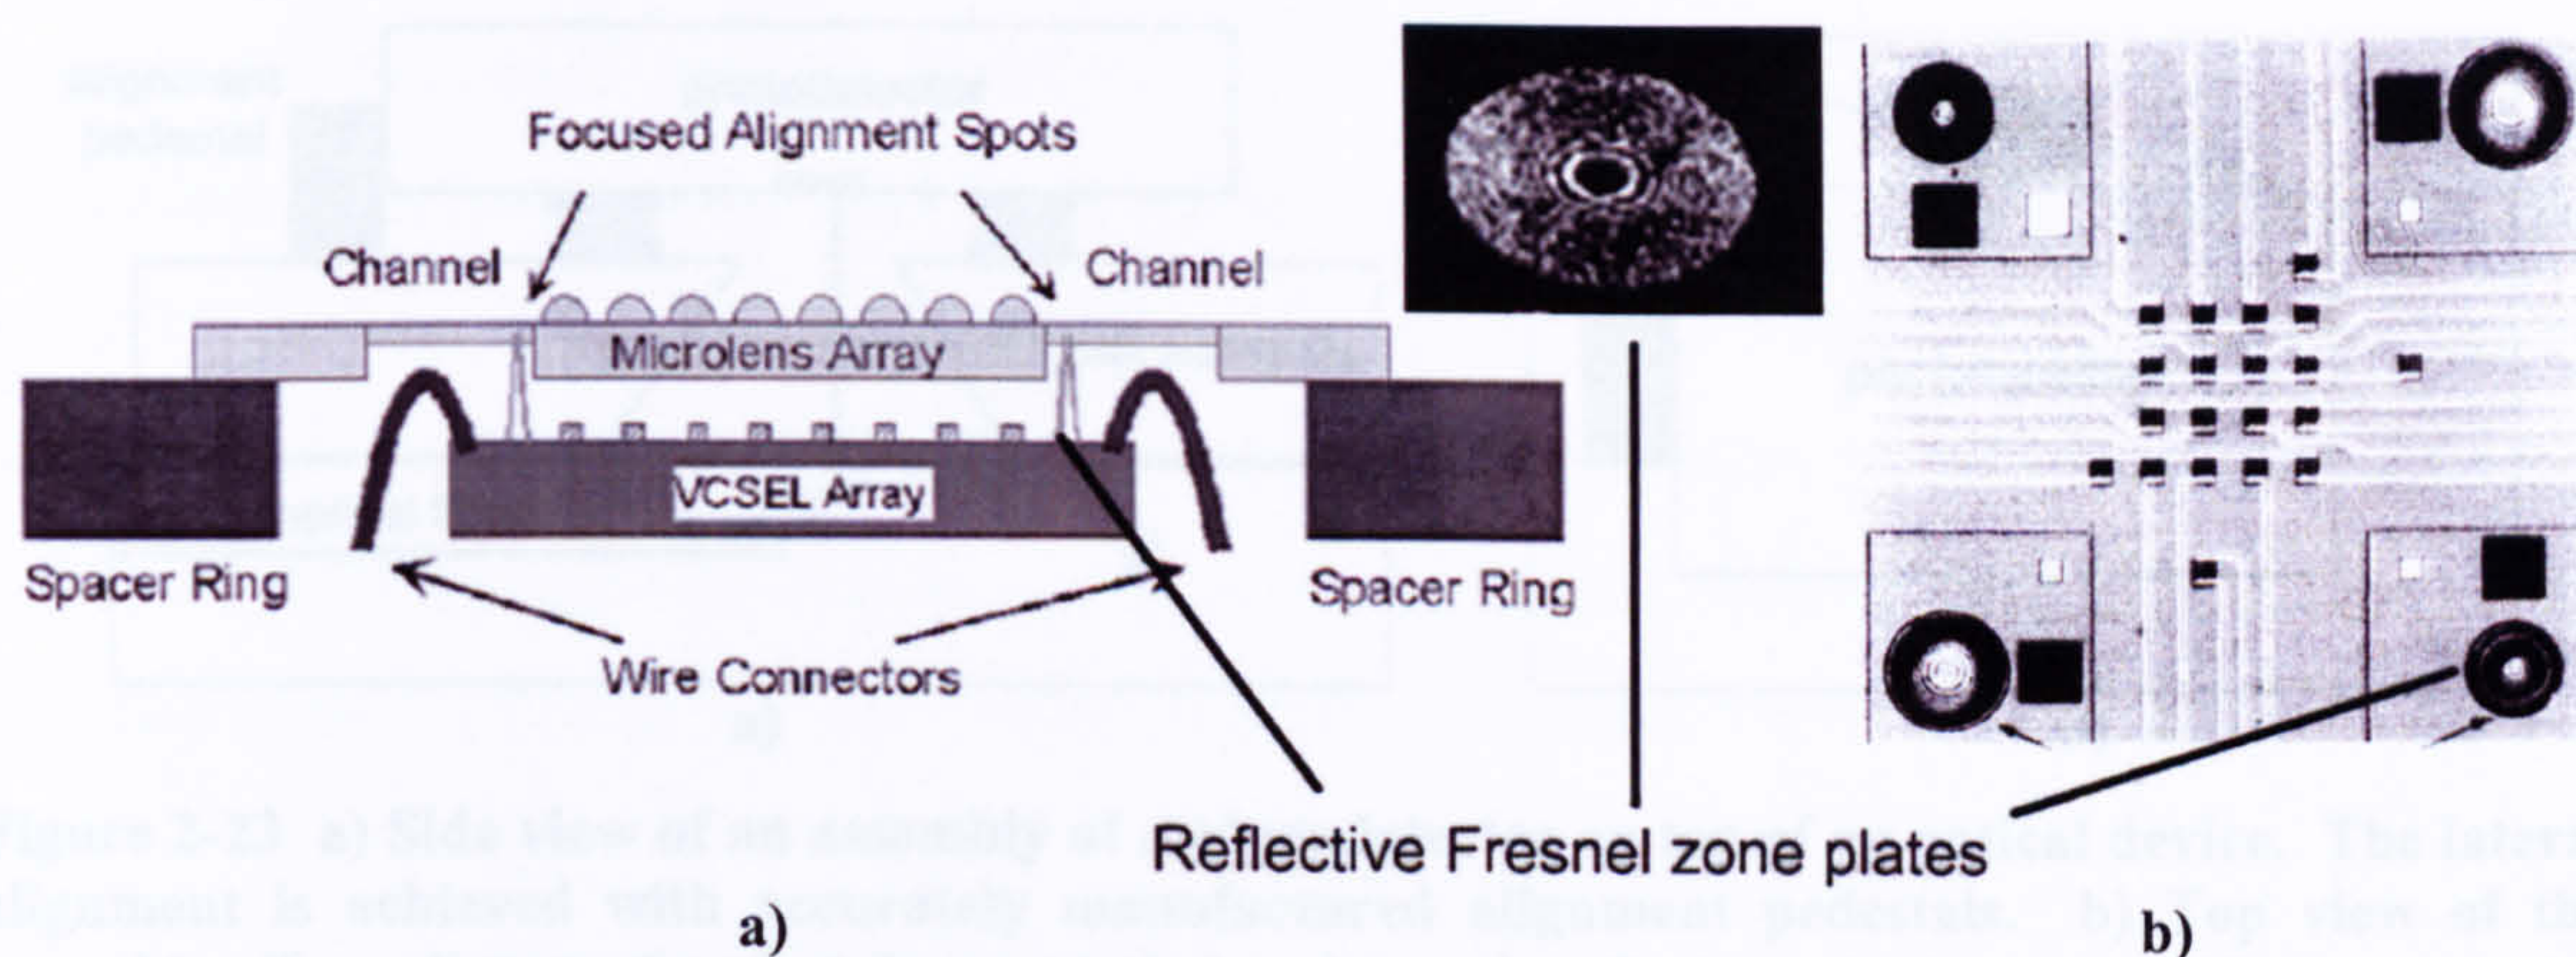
a) Side view of the VCSEL- microlens array assembly. The spacer ring determines the vertical distance. b) Top view VCSEL array that features reflective Fresnel zone plates (FZP). Pictures used with courtesy of [35 , 36].
